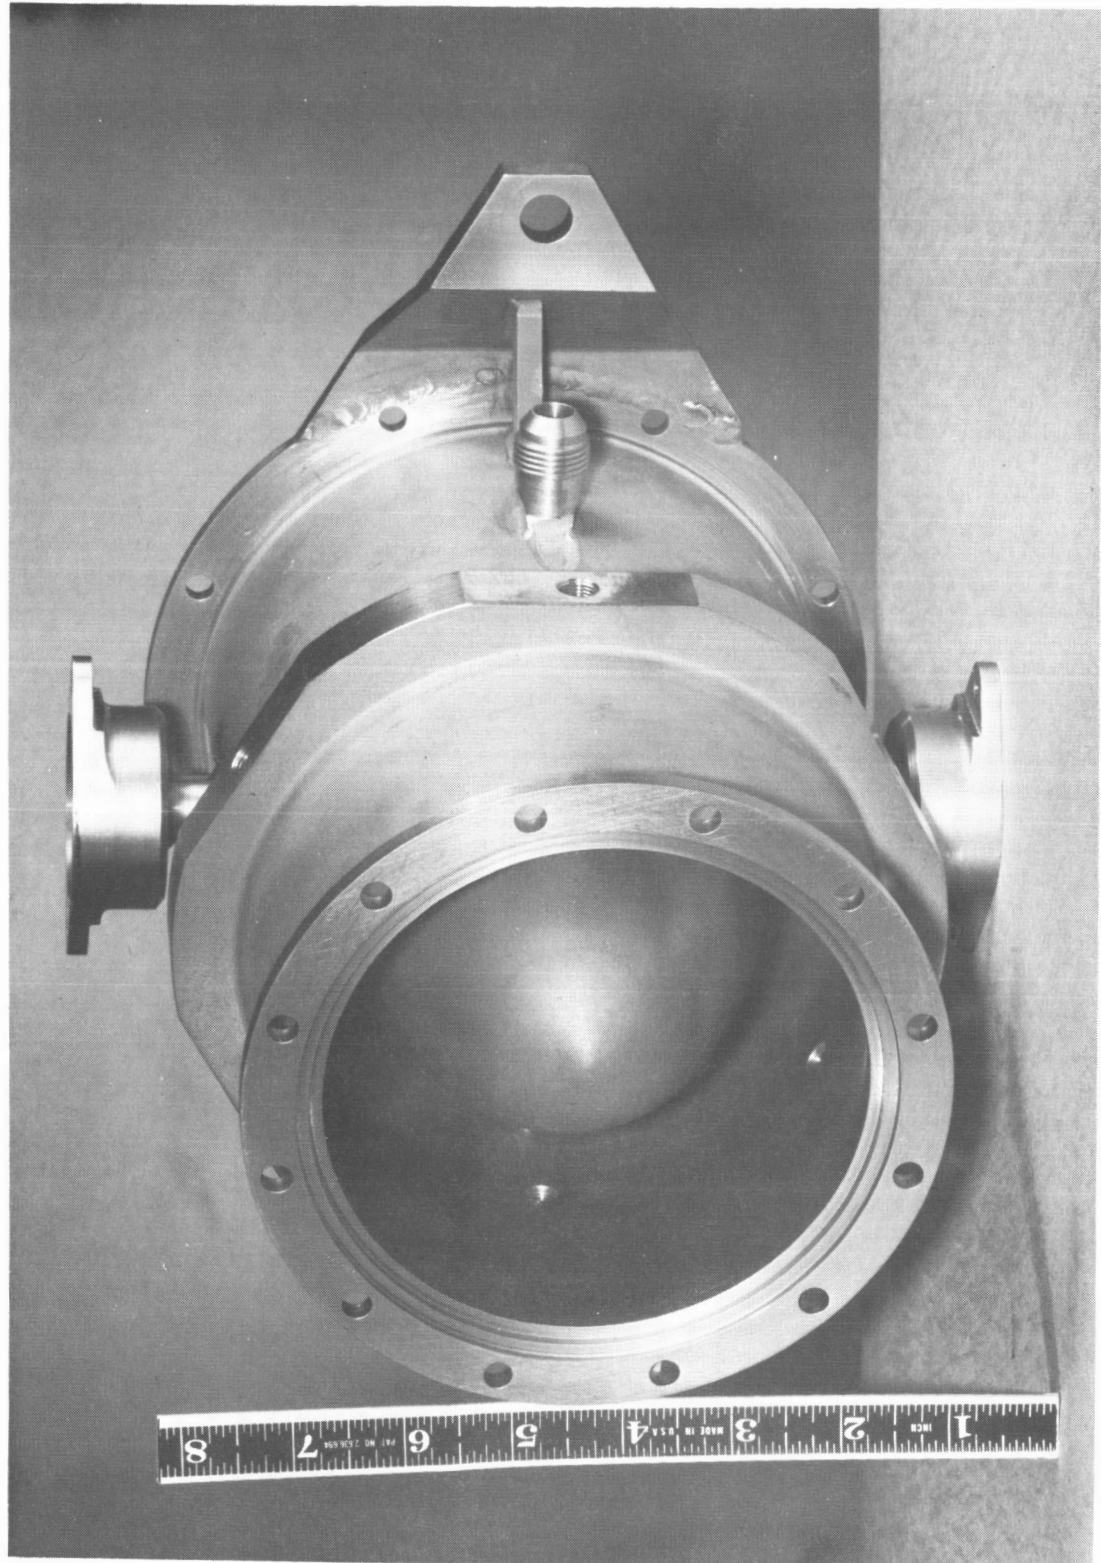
Inlet End of Inlet Cone and Duct Assembly XP-57192
